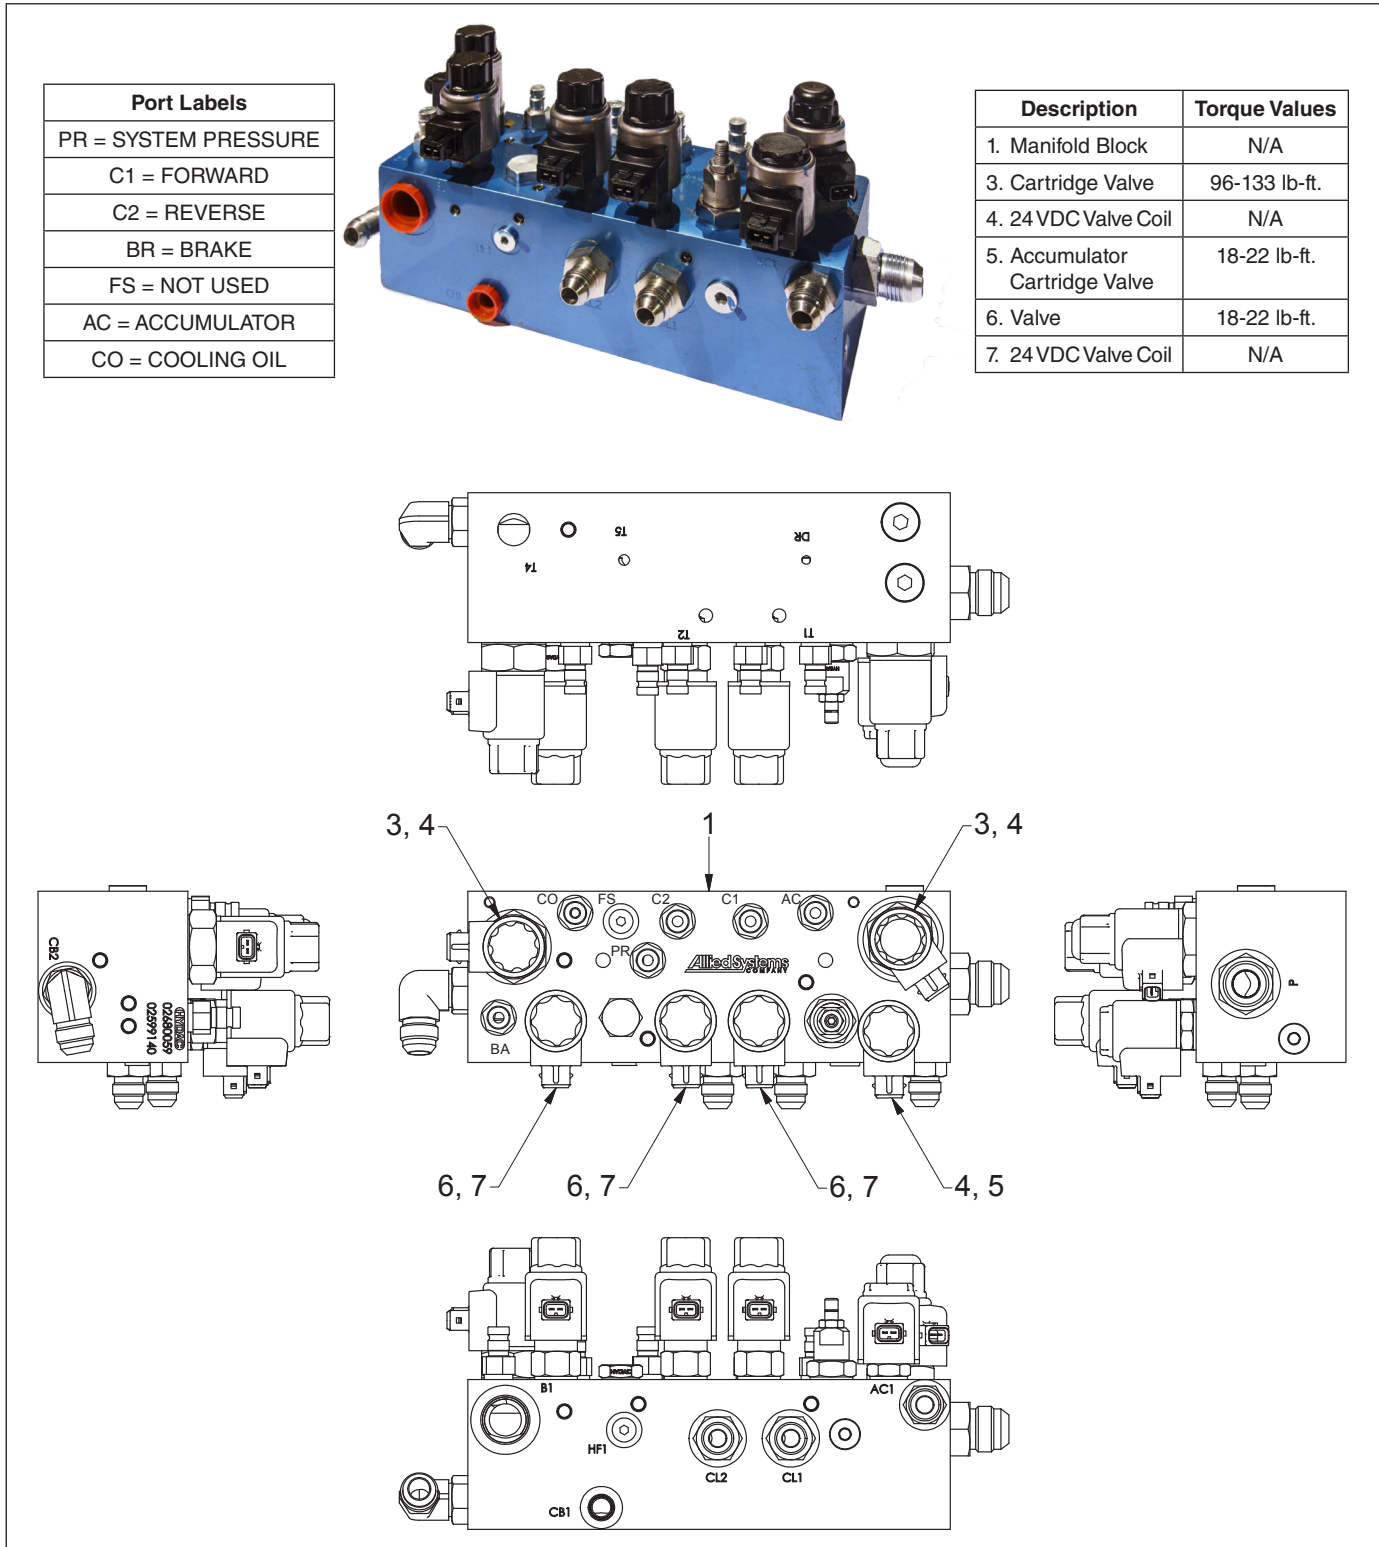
Valve Manifold Assembly and Hydraulic Schematic (1)
